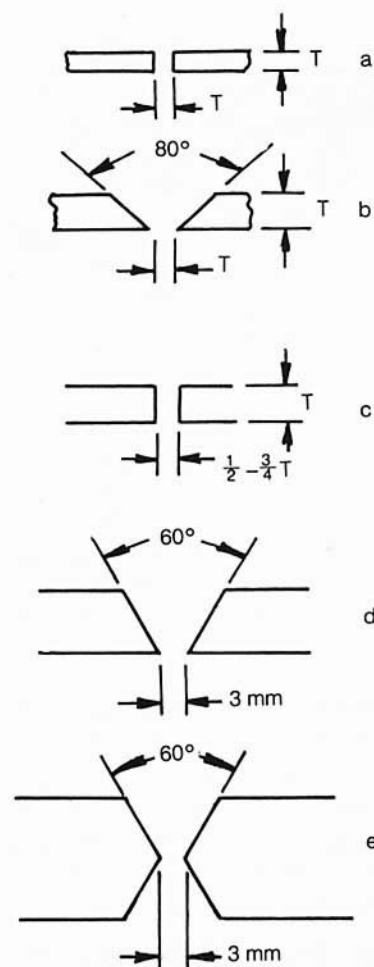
Butt welds, mild steel (oxyacetylene)
